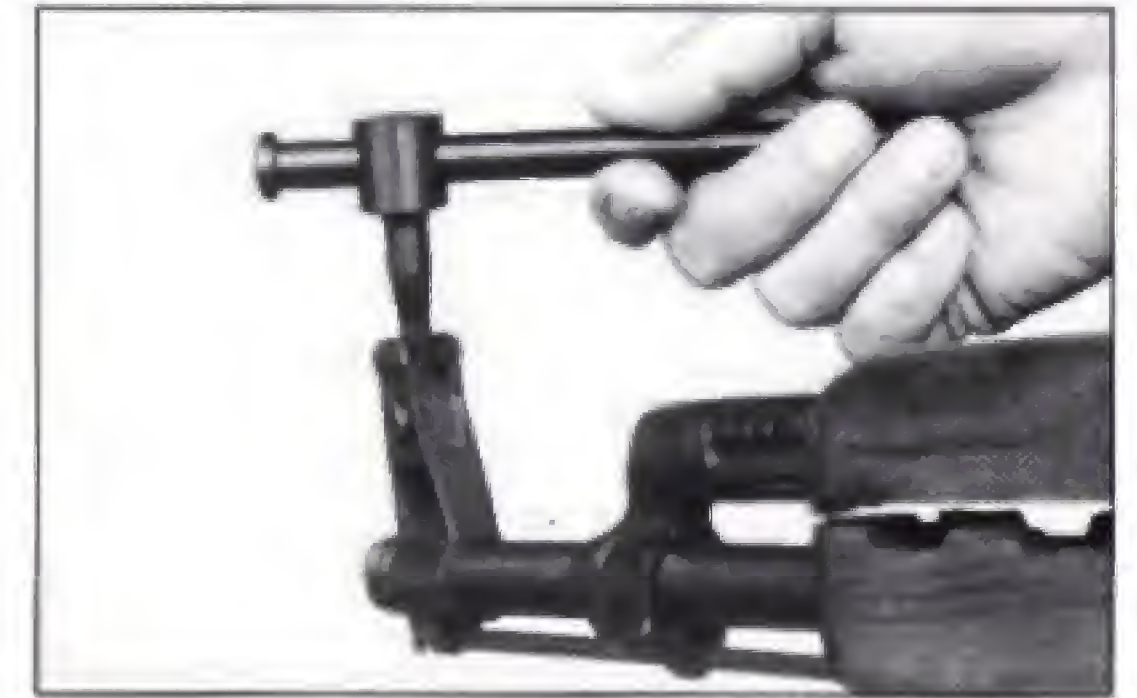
Adjusting the front sight (elevation) using the optional front sight adjustment tool.
